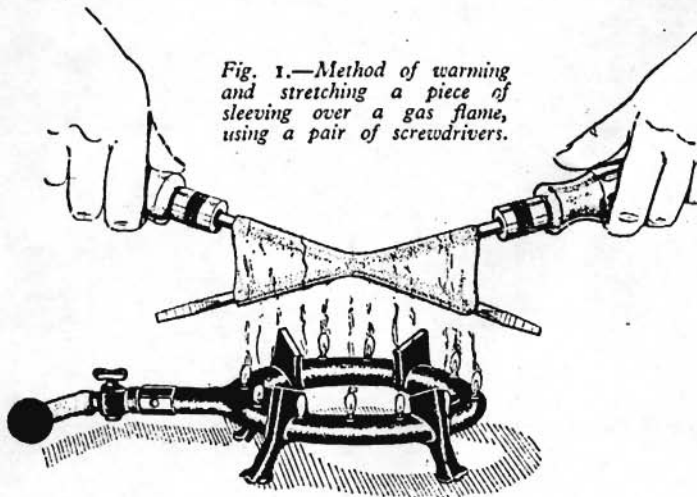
Method of warming and stretching a piece of sleeving over a gas flame, using a pair of screwdrivers.
